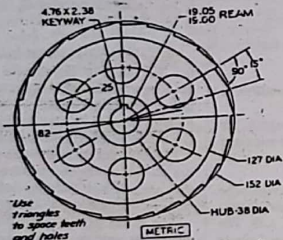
Ratchet Wheel. Using Layout A-2 or A4-2 (adjusted), draw in pencil. Omit dimensions and notes.
